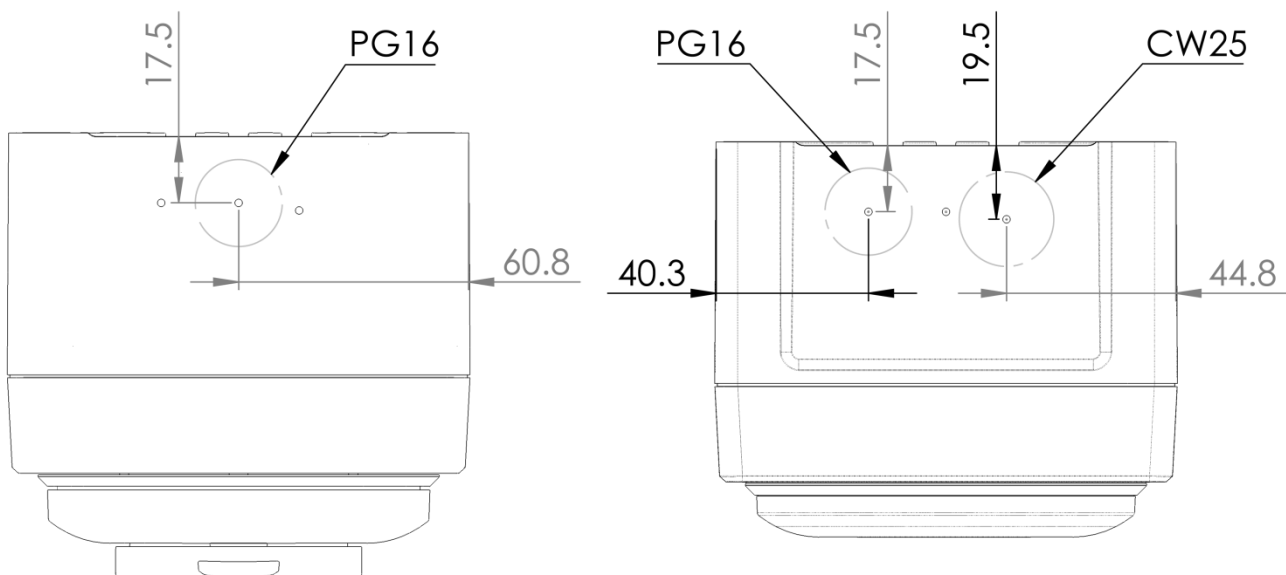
Main body cable gland hole locations (Left: Socket; Right: Tethered)
